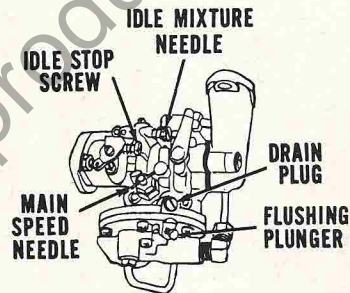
View showing location of adjustment points on some Tillotson carburetors.
